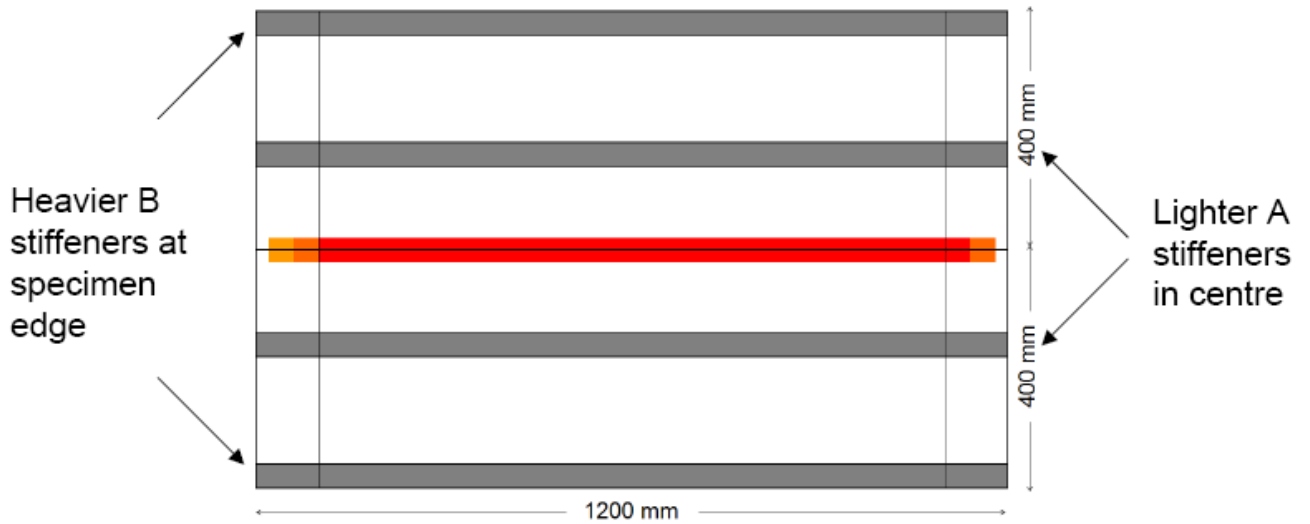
Phase 2 - Specified stiffened and welded test panel for static testing
